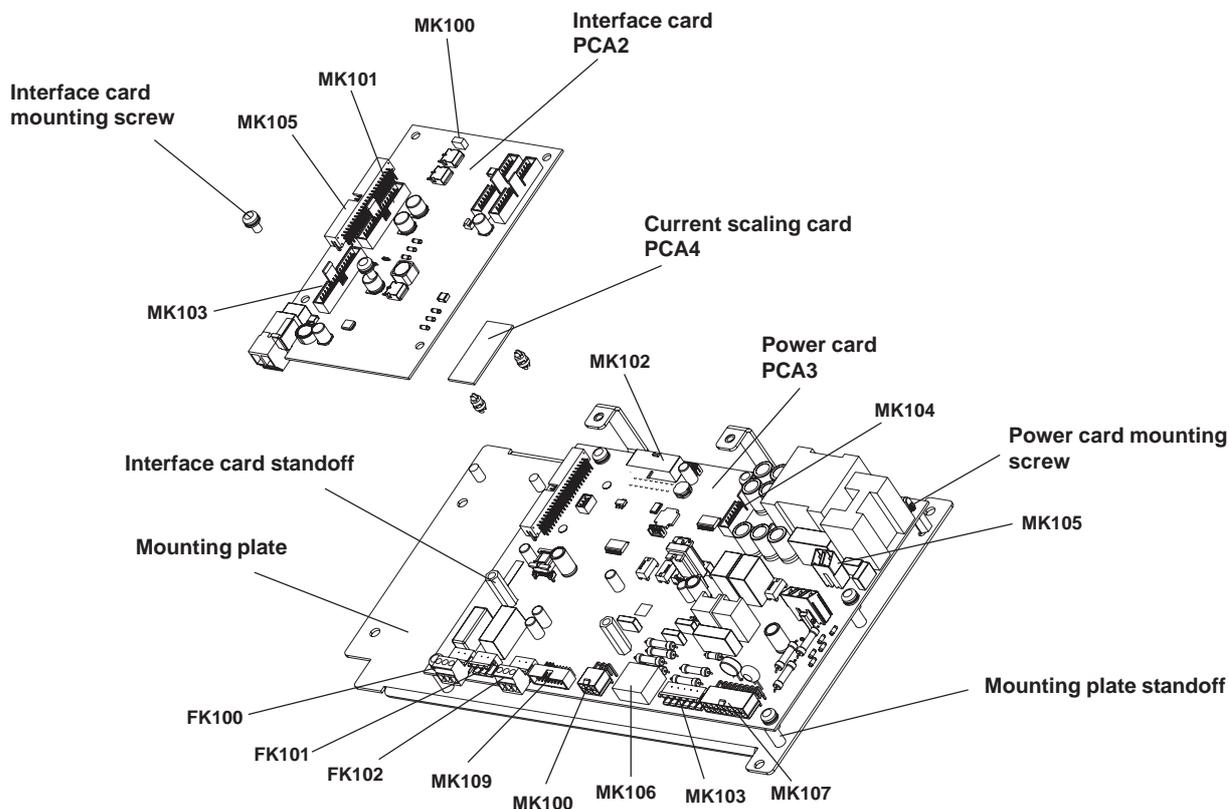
Interface Card, Power Card, and Mounting Plate
